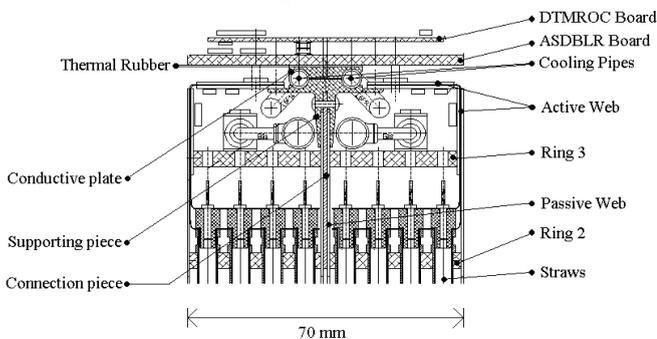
Layout at the outer radius of TRT end-cap wheel with schematic view of electronics cooling.
